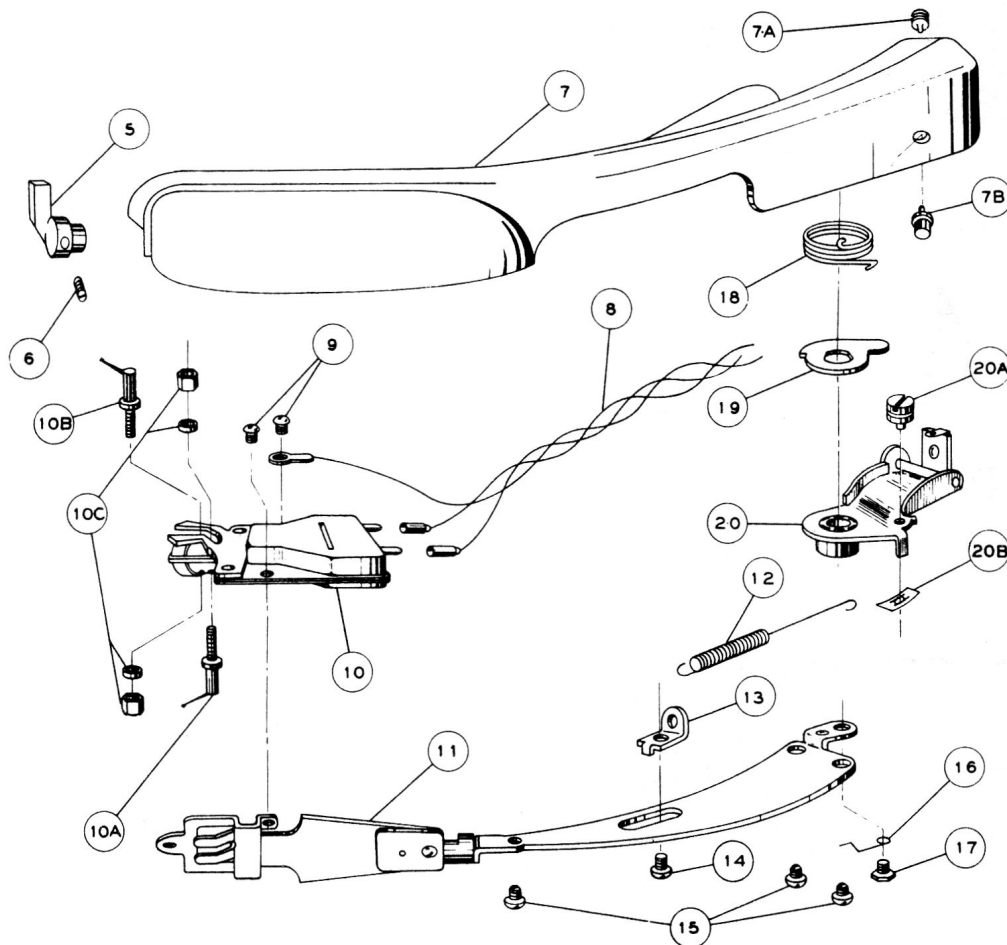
Pickup Arm Assembly for 124330-1,-2
